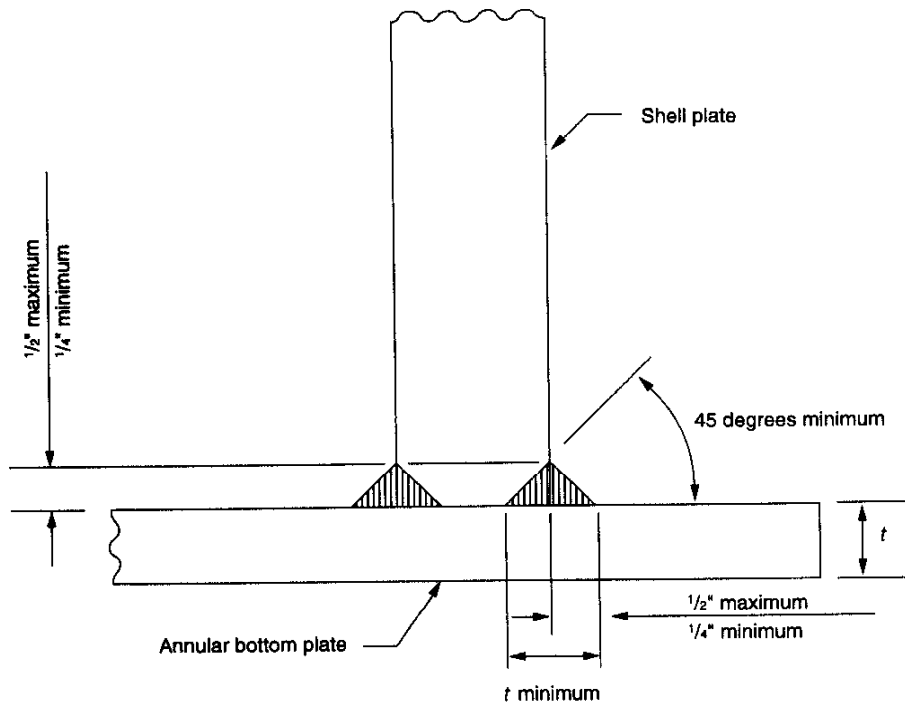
C—Detail of Double Fillet-Groove Weld for Annular Bottom Plates With a Nominal Thickness Greater Than 1/2 Inch (See 3.1.5.7, Item b)
